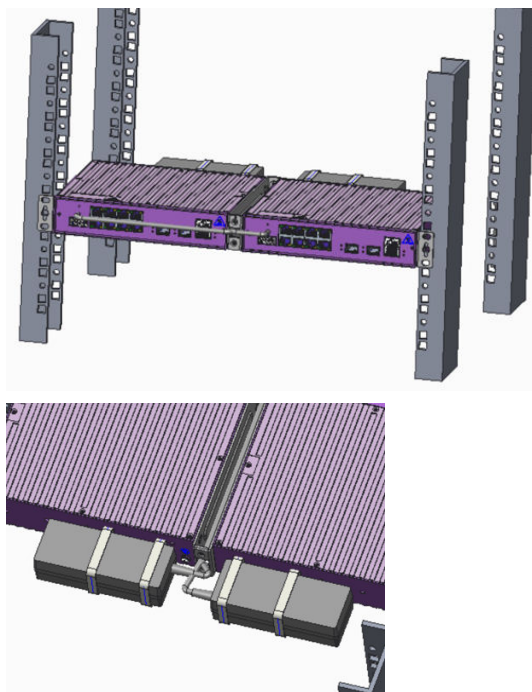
V300-8T-2X Dual Rack Mounting with PSU
